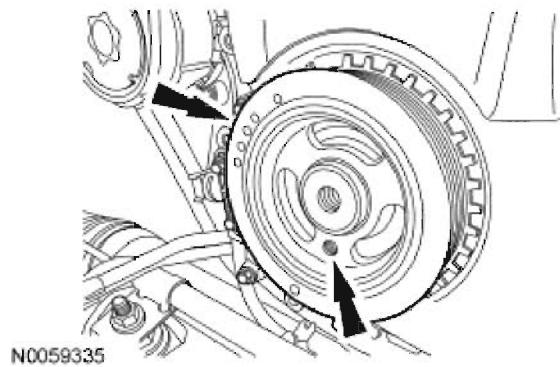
Identifying Special Tools Assembly (205-072-02, 205-126) And Crankshaft Pulley Bolt
